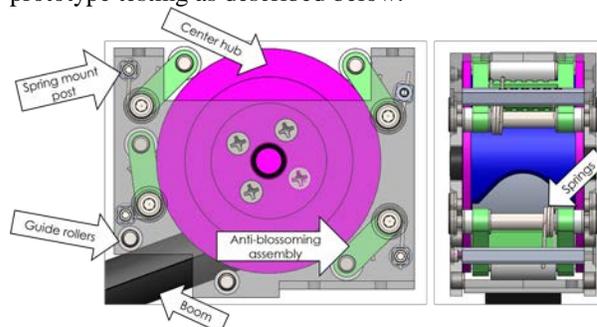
Boom deployer front view with transparent structure (left) and side view (right)
